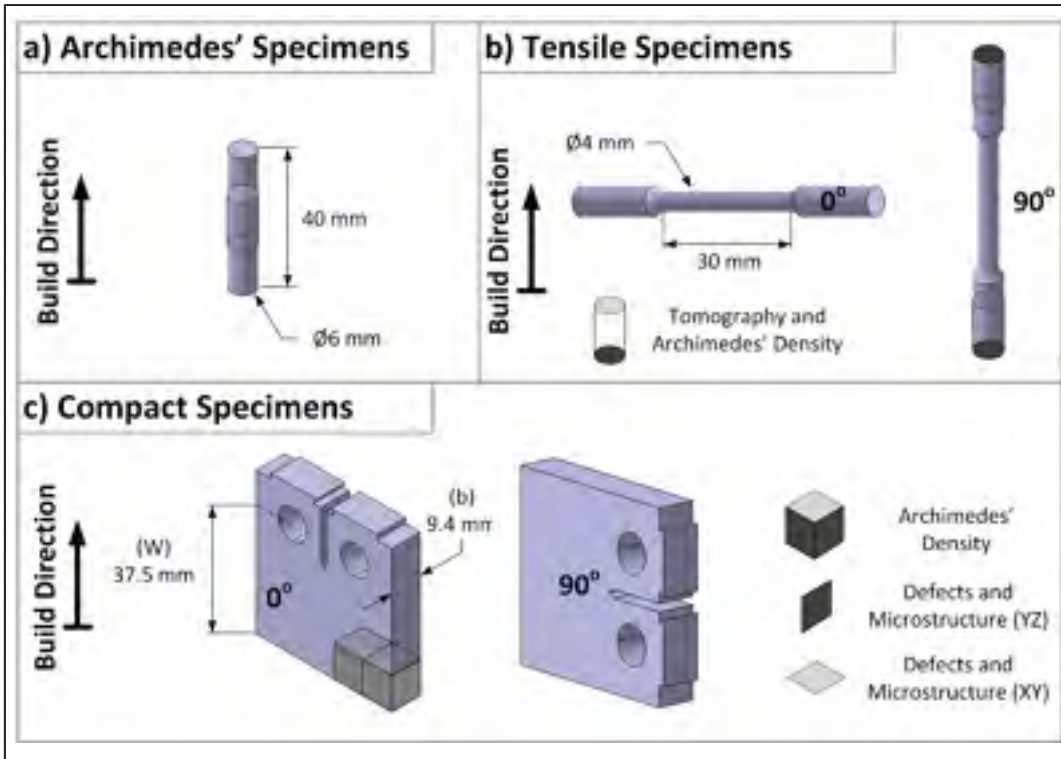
a) Cylindrical specimens for porosity evaluation experiment; b) tensile specimens for static mechanical testing, and c) compact specimens for fatigue crack propagation testing
